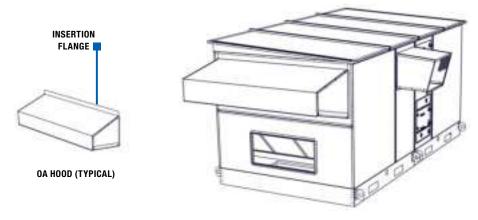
OUTSIDE AIR HOOD (TYPICAL)
